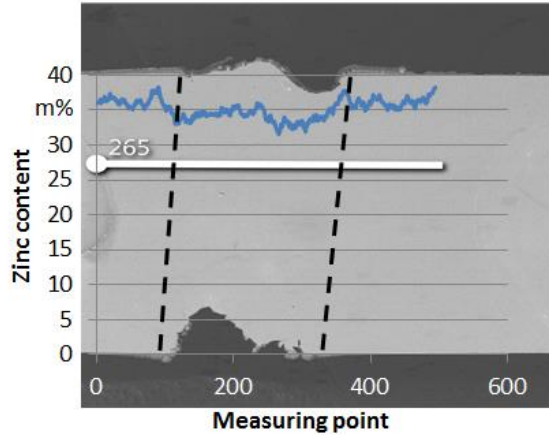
Zinc content in weld zone of CuZn37 welded with 2 kW and 33 mm/s
